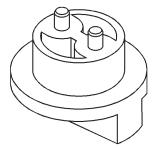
Model VT-1 Wet Valve Tool.
